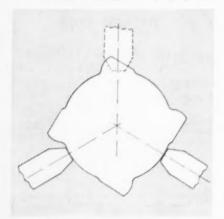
Example of casting difficult to hold concentrically by geared 3-jaw chuck.
